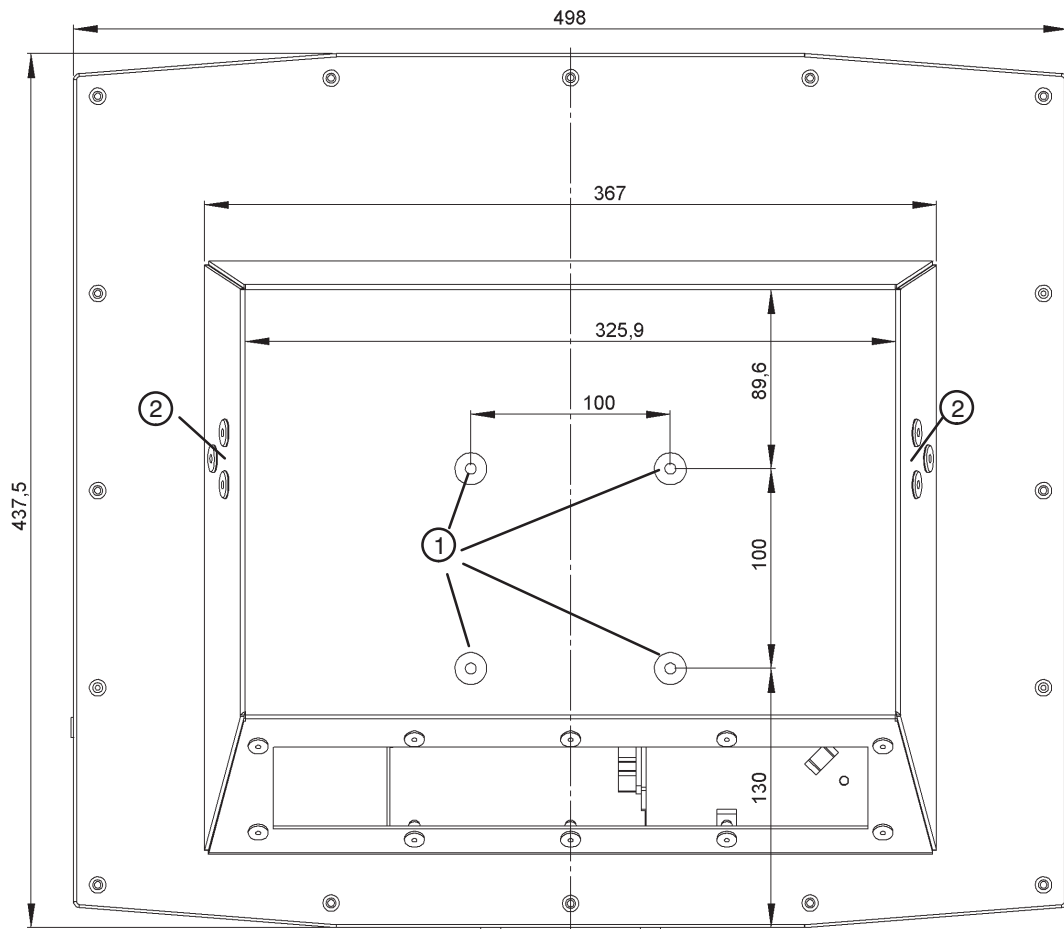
Back, S19 stainless steel enclosure (all dimensions in mm)
